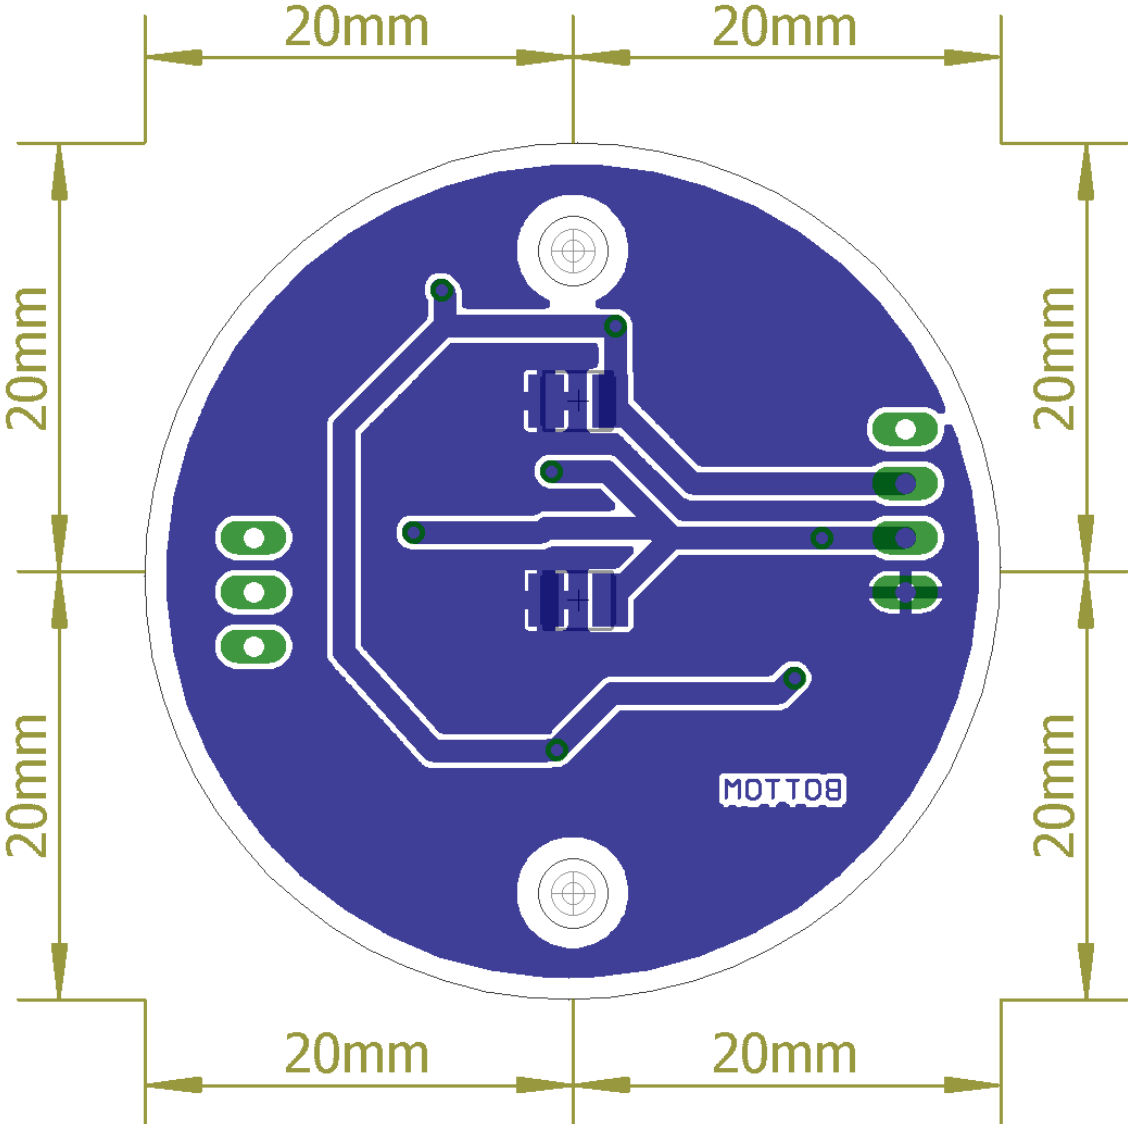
Final PCB Footprint - Rx layer (Bottom)
